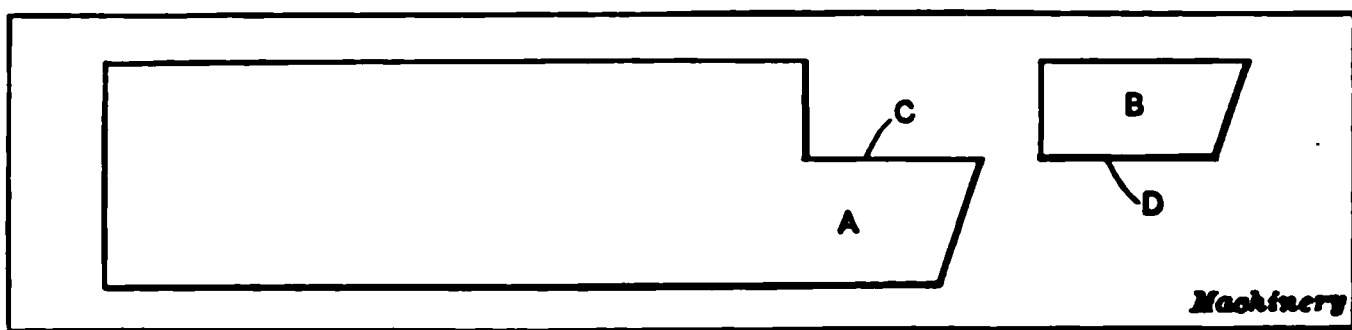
High-speed Steel Cutter to be Welded to Shank of Machine Steel
